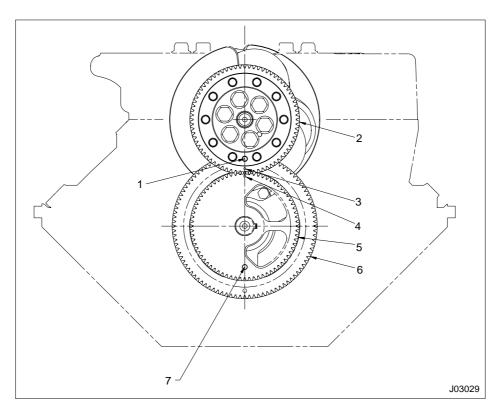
Crankshaft / camshaft / primary balancer timing alignment
